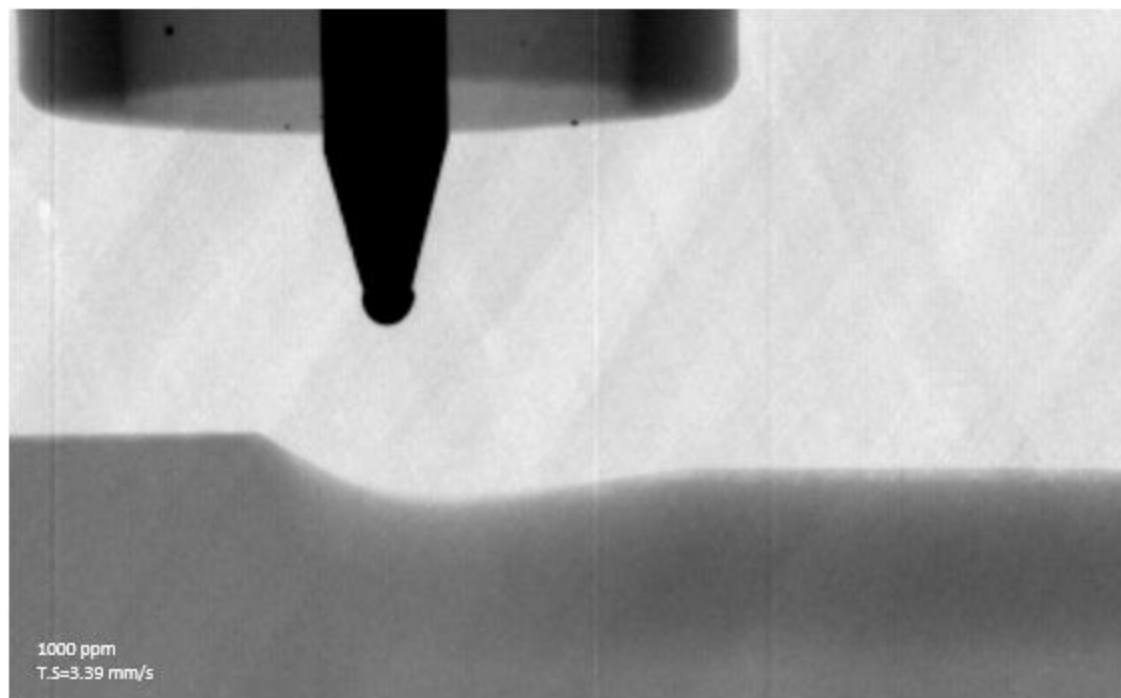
Alloy 6061 welded using 1000 ppm of shielding gas hydrogen at 3.39 mm/s
